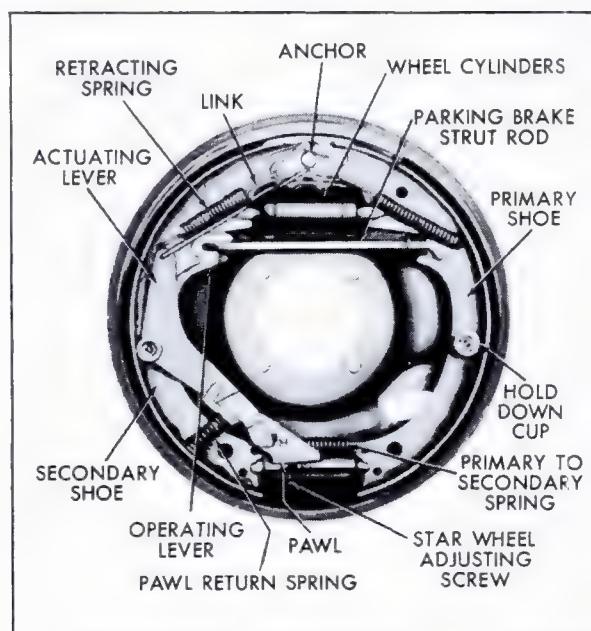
Rear Wheel Drum Brake Mechanism
